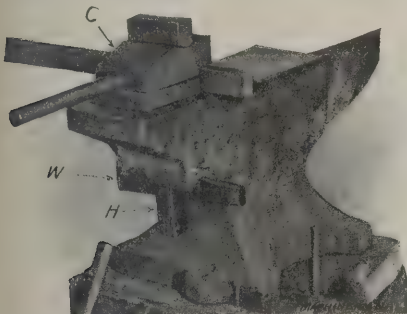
Tool Cut Off and Clamped to Anvil ready to be Bent Down.
